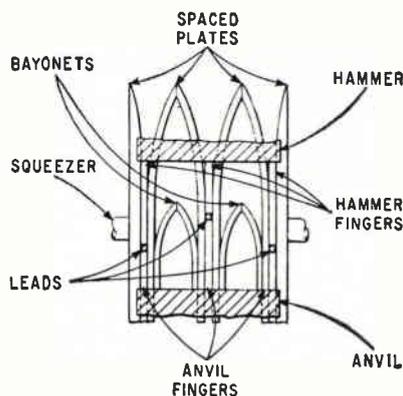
End view of squeeze position. Plates are shaped to comb leads as they enter
